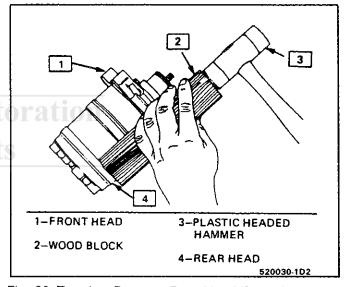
Tapping Front or Rear Head Free of Cylinder 6 o'clock positions to support the J-33016 assembly guide pins in the through bolt holes shown in Figure 30. Insert the guide pins with the small diameter end "up" in the locations shown.
